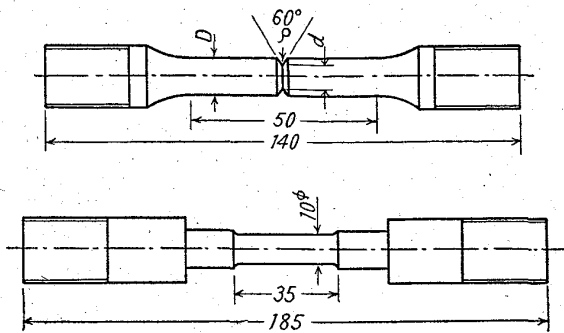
Shapes and dimensions (mm) of test pieces used.
